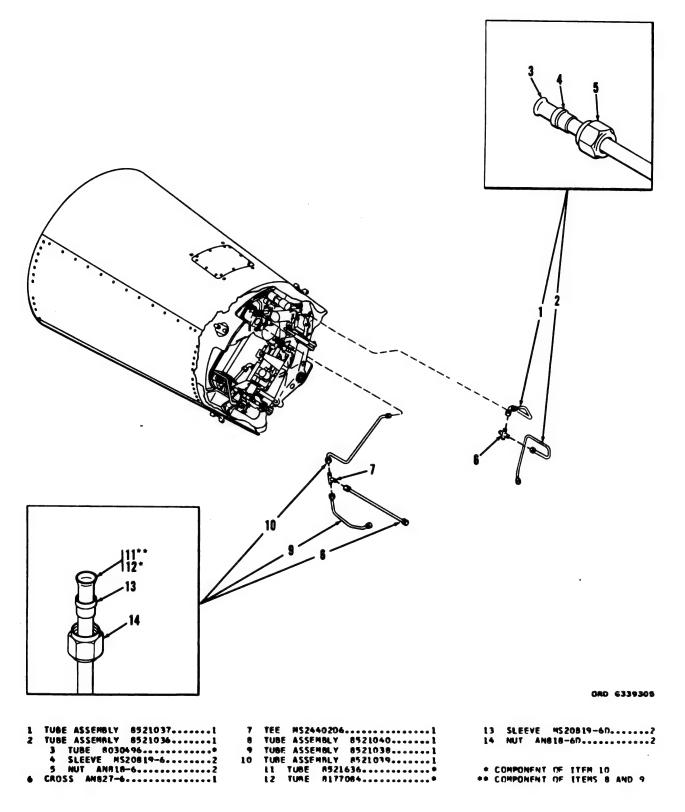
SYSTEM INSTALLATION, HYDRAULIC /9020507/
